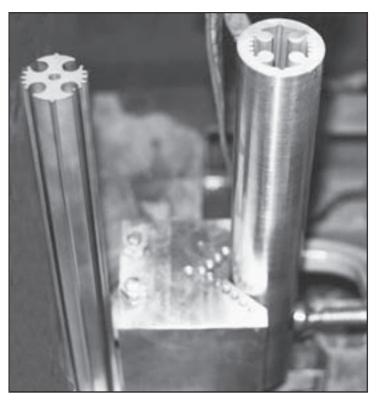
2 Showpiece: 16 Inches (406 mm) Tall—Cut at Reliable EDM (They can cut up to 36" (914 mm) tall)
